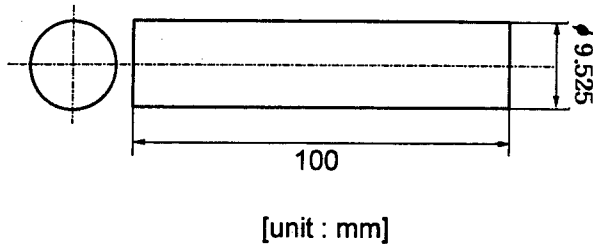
Dimension of specimen for rolling contact fatigue test.
